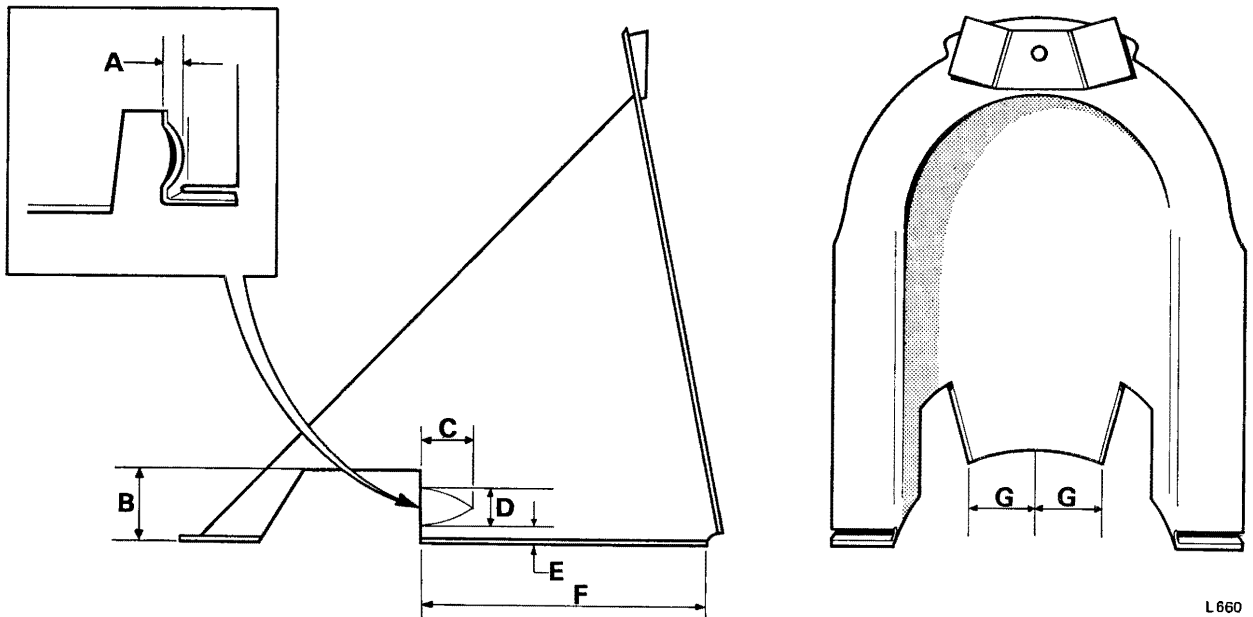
DIMENSIONS OF THE CUT-AWAYS ON THE FILLER TUBE COVER
